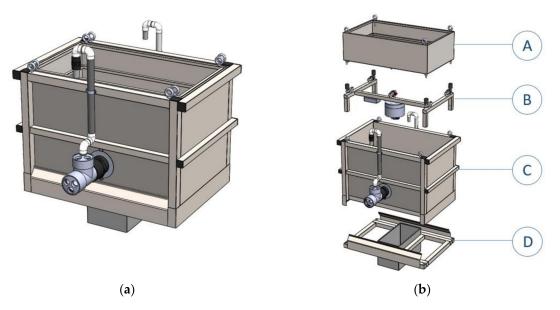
Perspective (a) and exploded (b) views of the developed lysimeter: (A) cultivation tank; (B) support for the cultivation tank; (C) main structure and (D) base.
